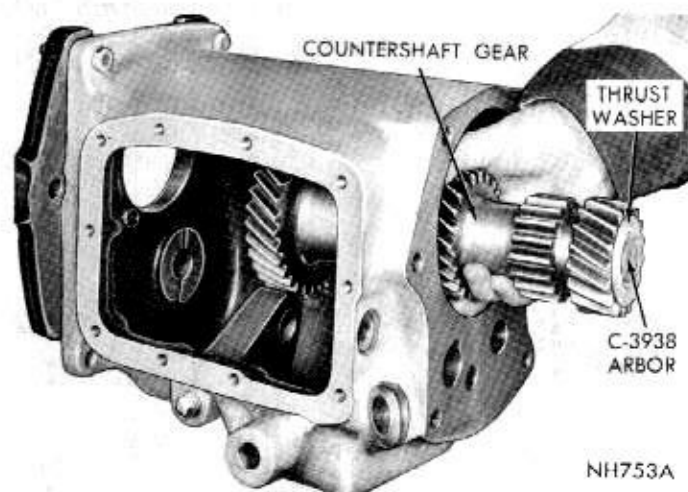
Removing or Installing Countershaft Gear and Arbor
